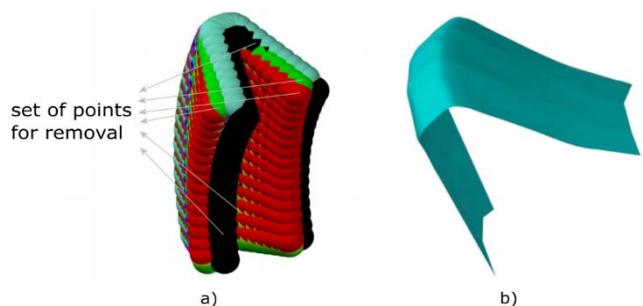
Tooth generated by a) points, b) surfaces made through points
